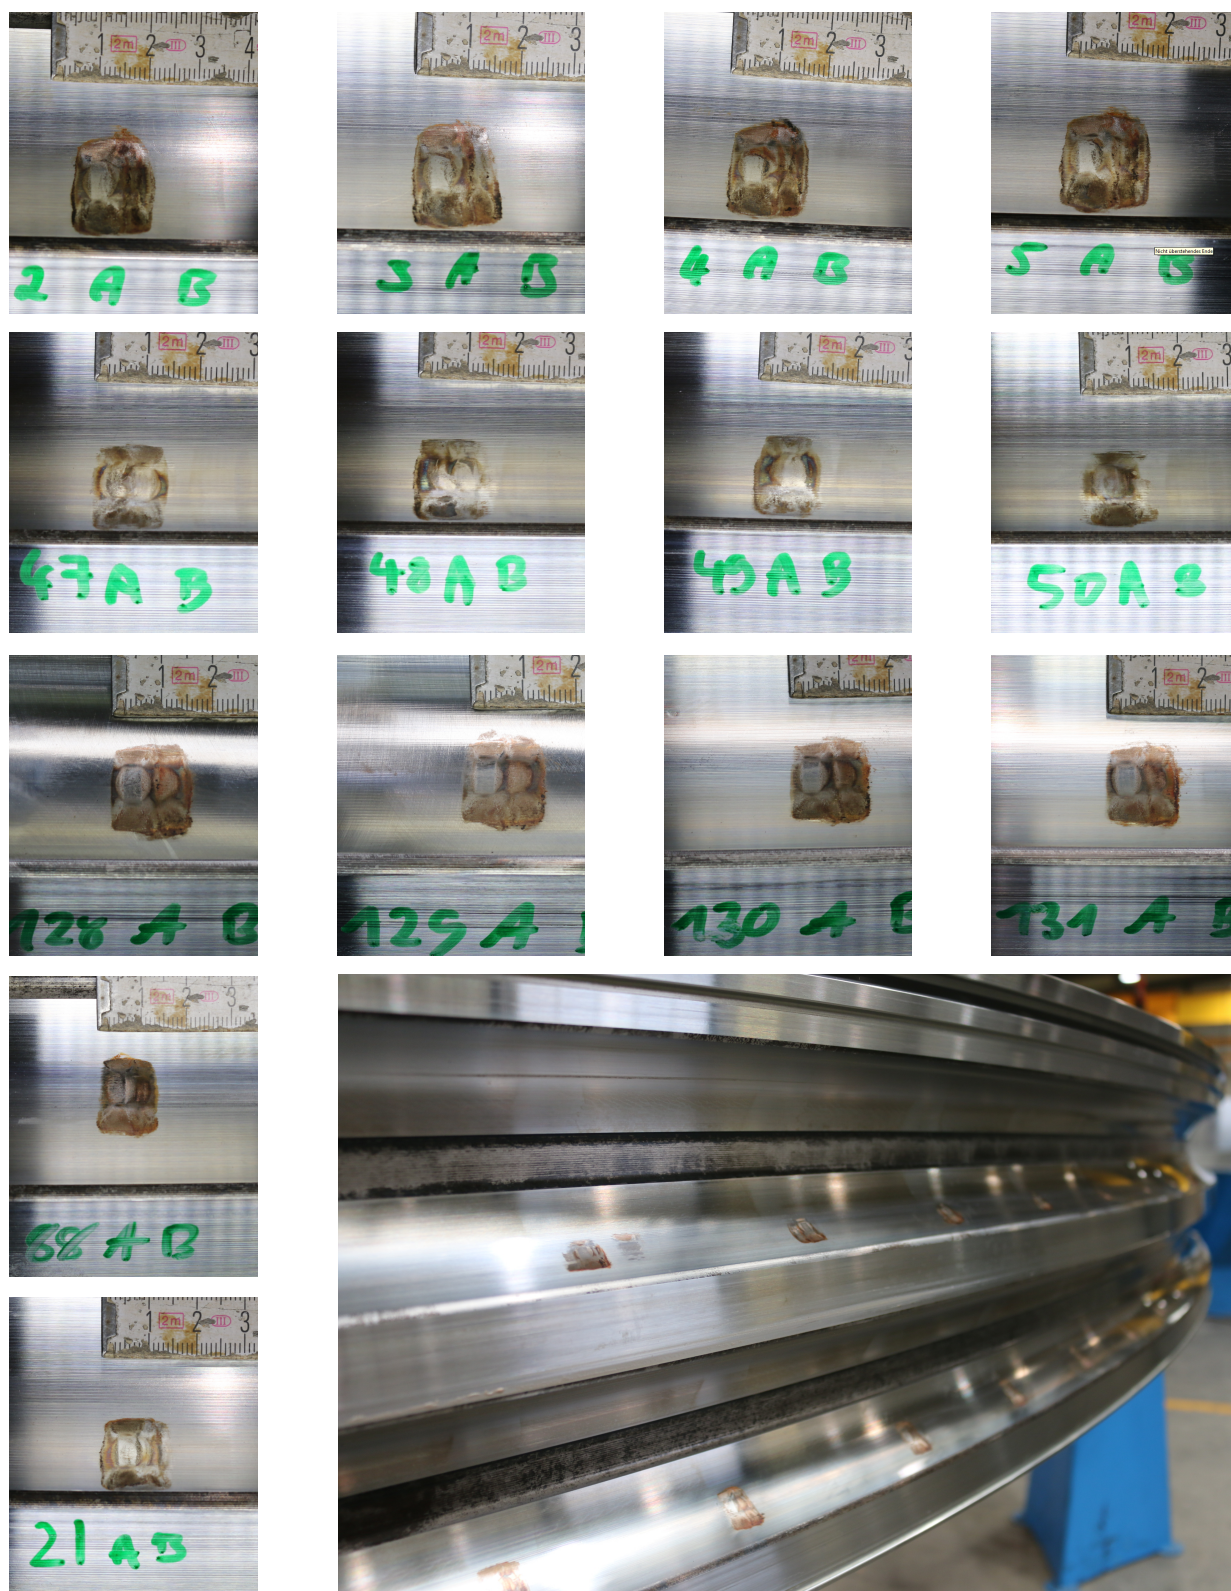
Raceway condition inner ring, Test ID 10, Bearing ID 0001
